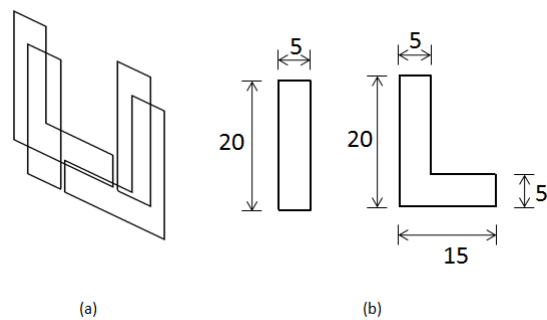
(a) shows the 'L' and 'I' pieces forming the 'U' shaped core. (b) shows the individual piece dimensions. All dimensions in mm
